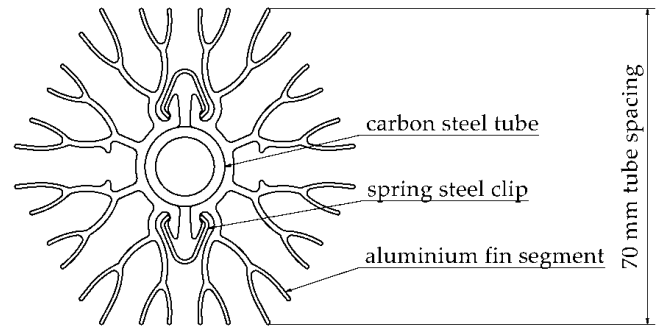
Drawing of fin design showing central steel tube, two fin segments and assembly clips.
